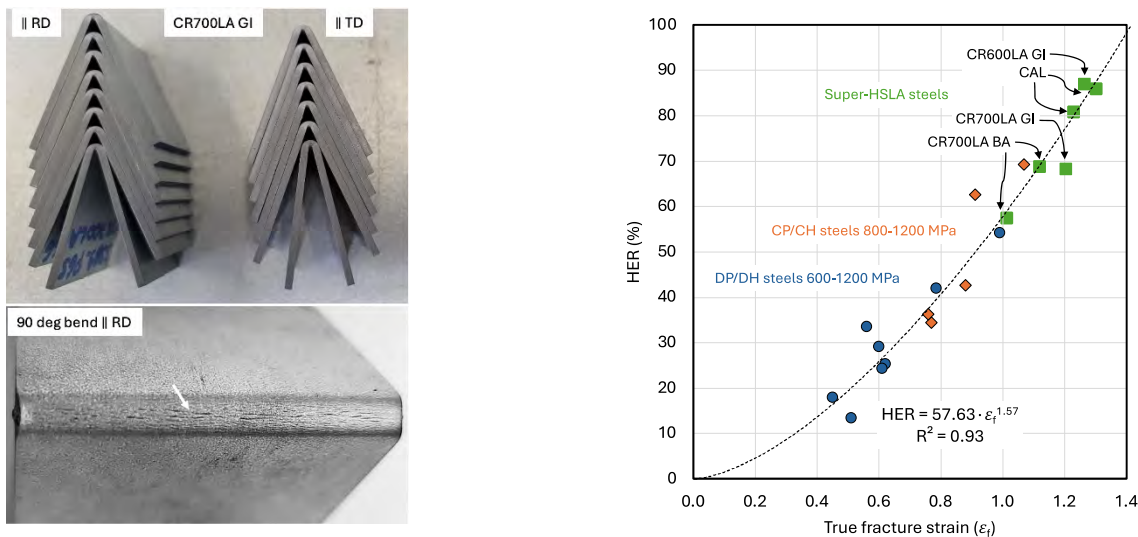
(a) Samples of CR700LA GI Super HSLA-steel after VDA238-100 bending tests; microcrack pattern developing at the surface of the extrados when bending to 90 degrees along the rolling direction. (b) HER performance of Super-HSLA steels with established AHSS grades [7] in function of the measured true fracture strain.
